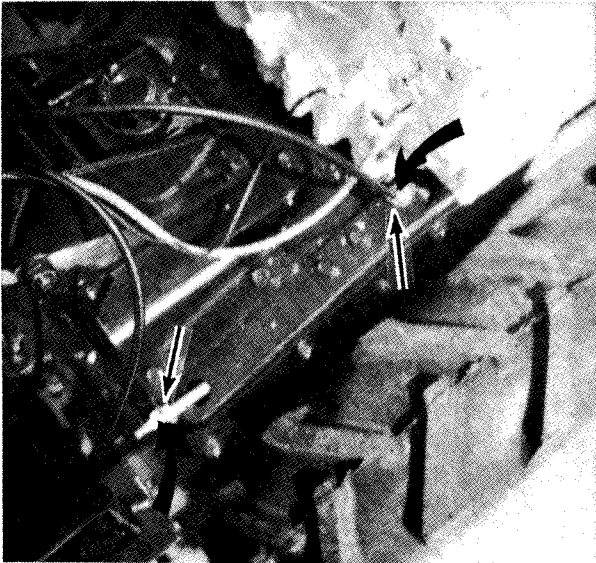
CLUTCH LOWER ADJUSTMENTS
